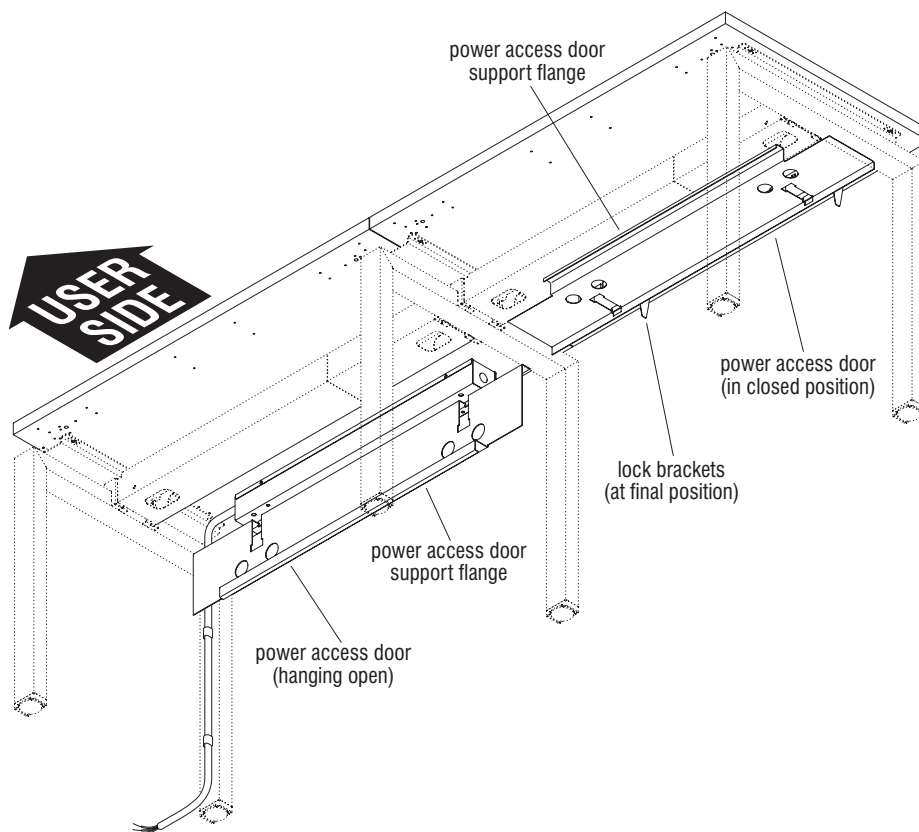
Single-Sided Fixed Benching with Hardwired Electrical - Access Door Installation
